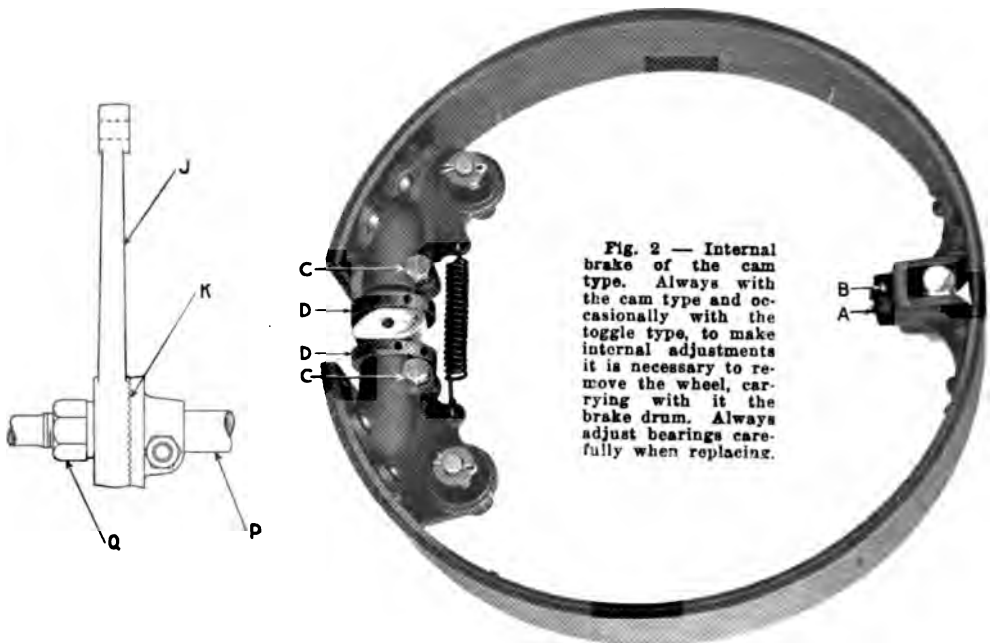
Internal brake of the cam type. Always with the cam type and occasionally with the toggle type, to make internal adjustments it is necessary to remove the wheel, carrying with it the brake drum. Always adjust bearings carefully when replacing.
